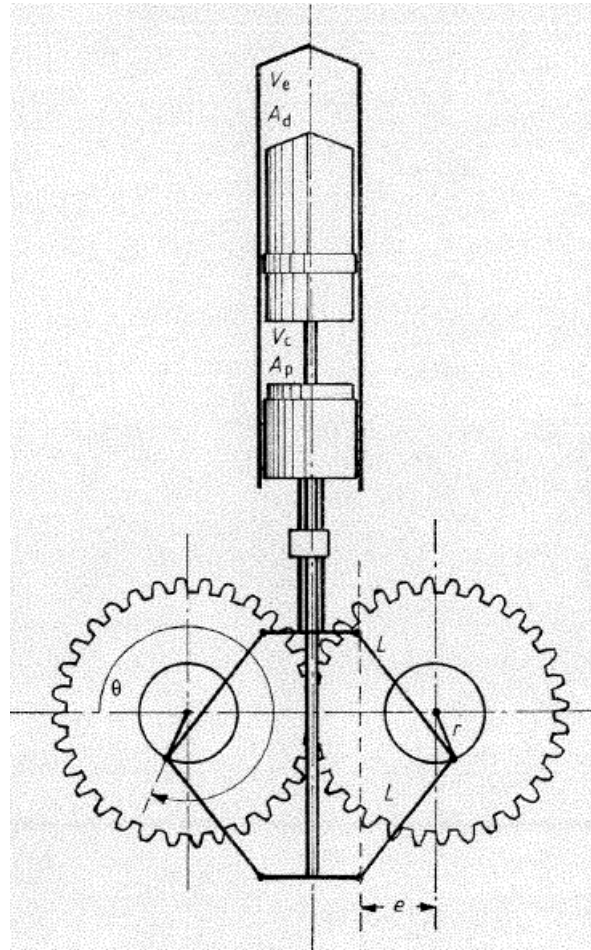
GPU-3 Stirling engine diagram showing dimensions [116]
